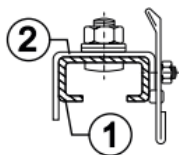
End Stop Assembly (Stainless) - Bottom End Stop (Gated) (P/N 506275)
